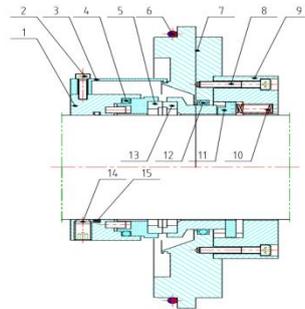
Seal design of new oval multi-head oil and gas mixing pump
